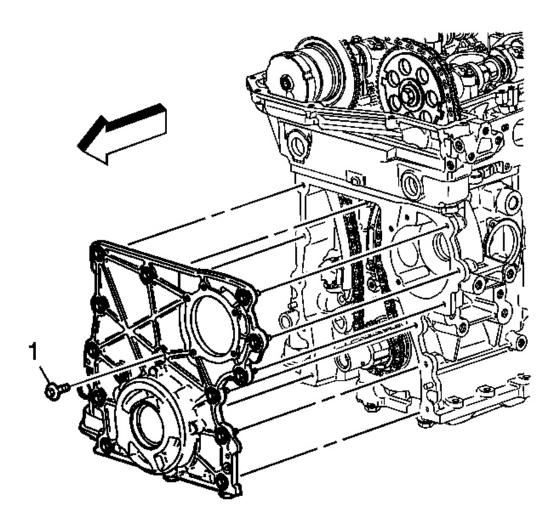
View Of 7 mm Center Bolt Courtesy of GENERAL MOTORS CORP.
